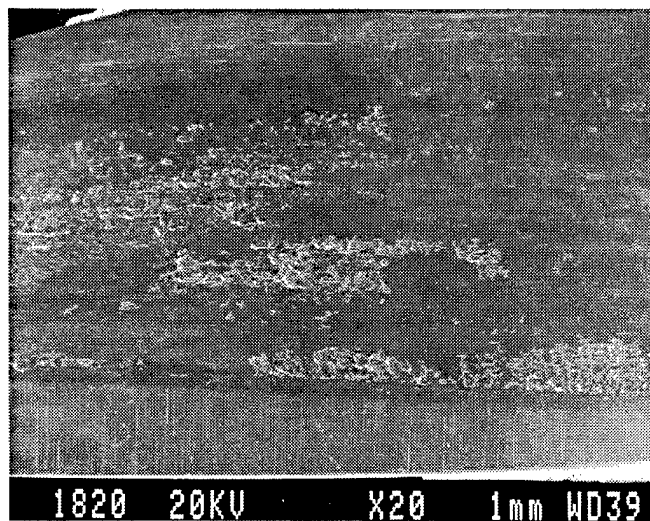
Pitting damage typically found during testing. (set "J").
